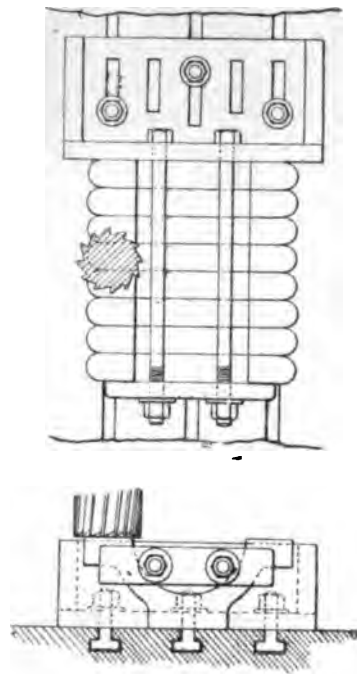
End Mill tooling Joints of Eccentric Straps clamped against Face of Angle Plate.
